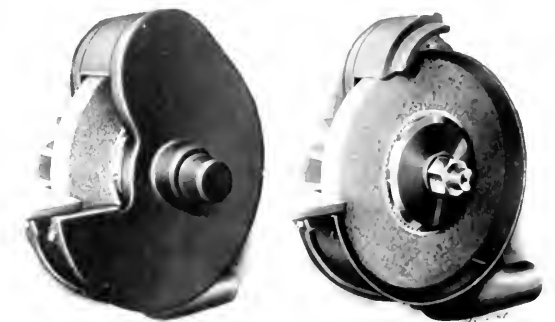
Protection- and Dust-hood of the Norton Model E Grinding Wheel Stand shown Closed and Open
